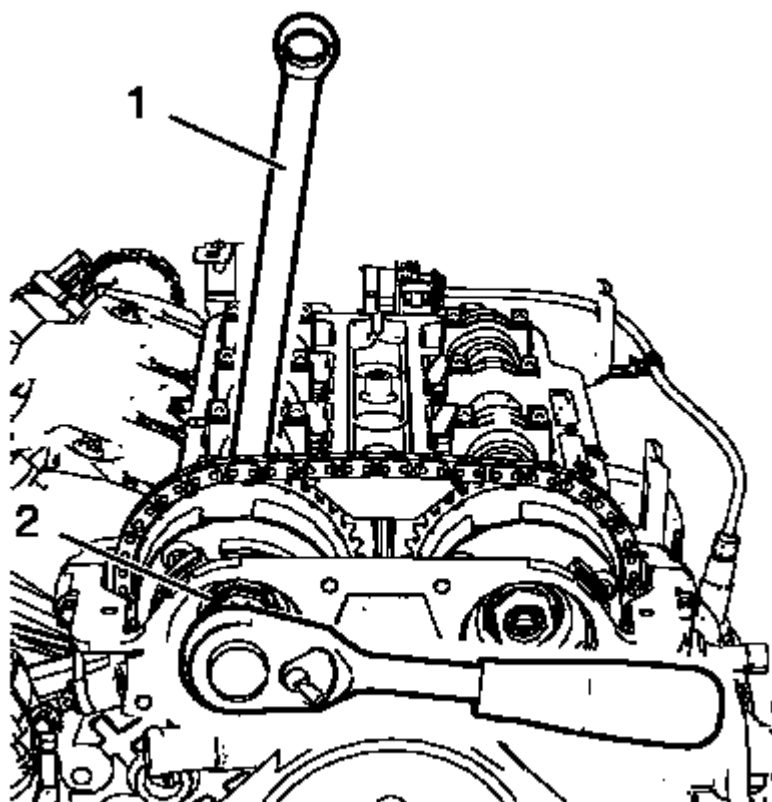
Intake Camshaft Sprocket Bolt And Wrench
